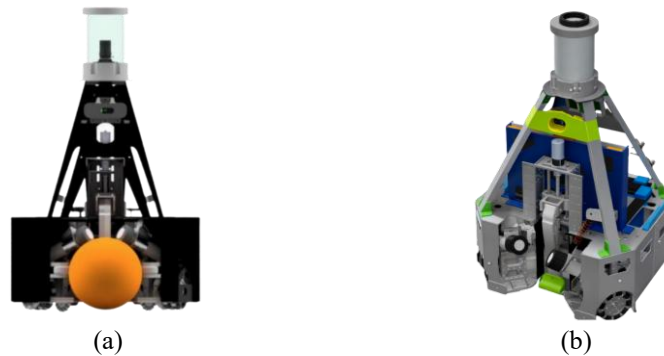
(a) 3D design 3 Wheel Robots (b) 3D design 4 Wheel Robots
